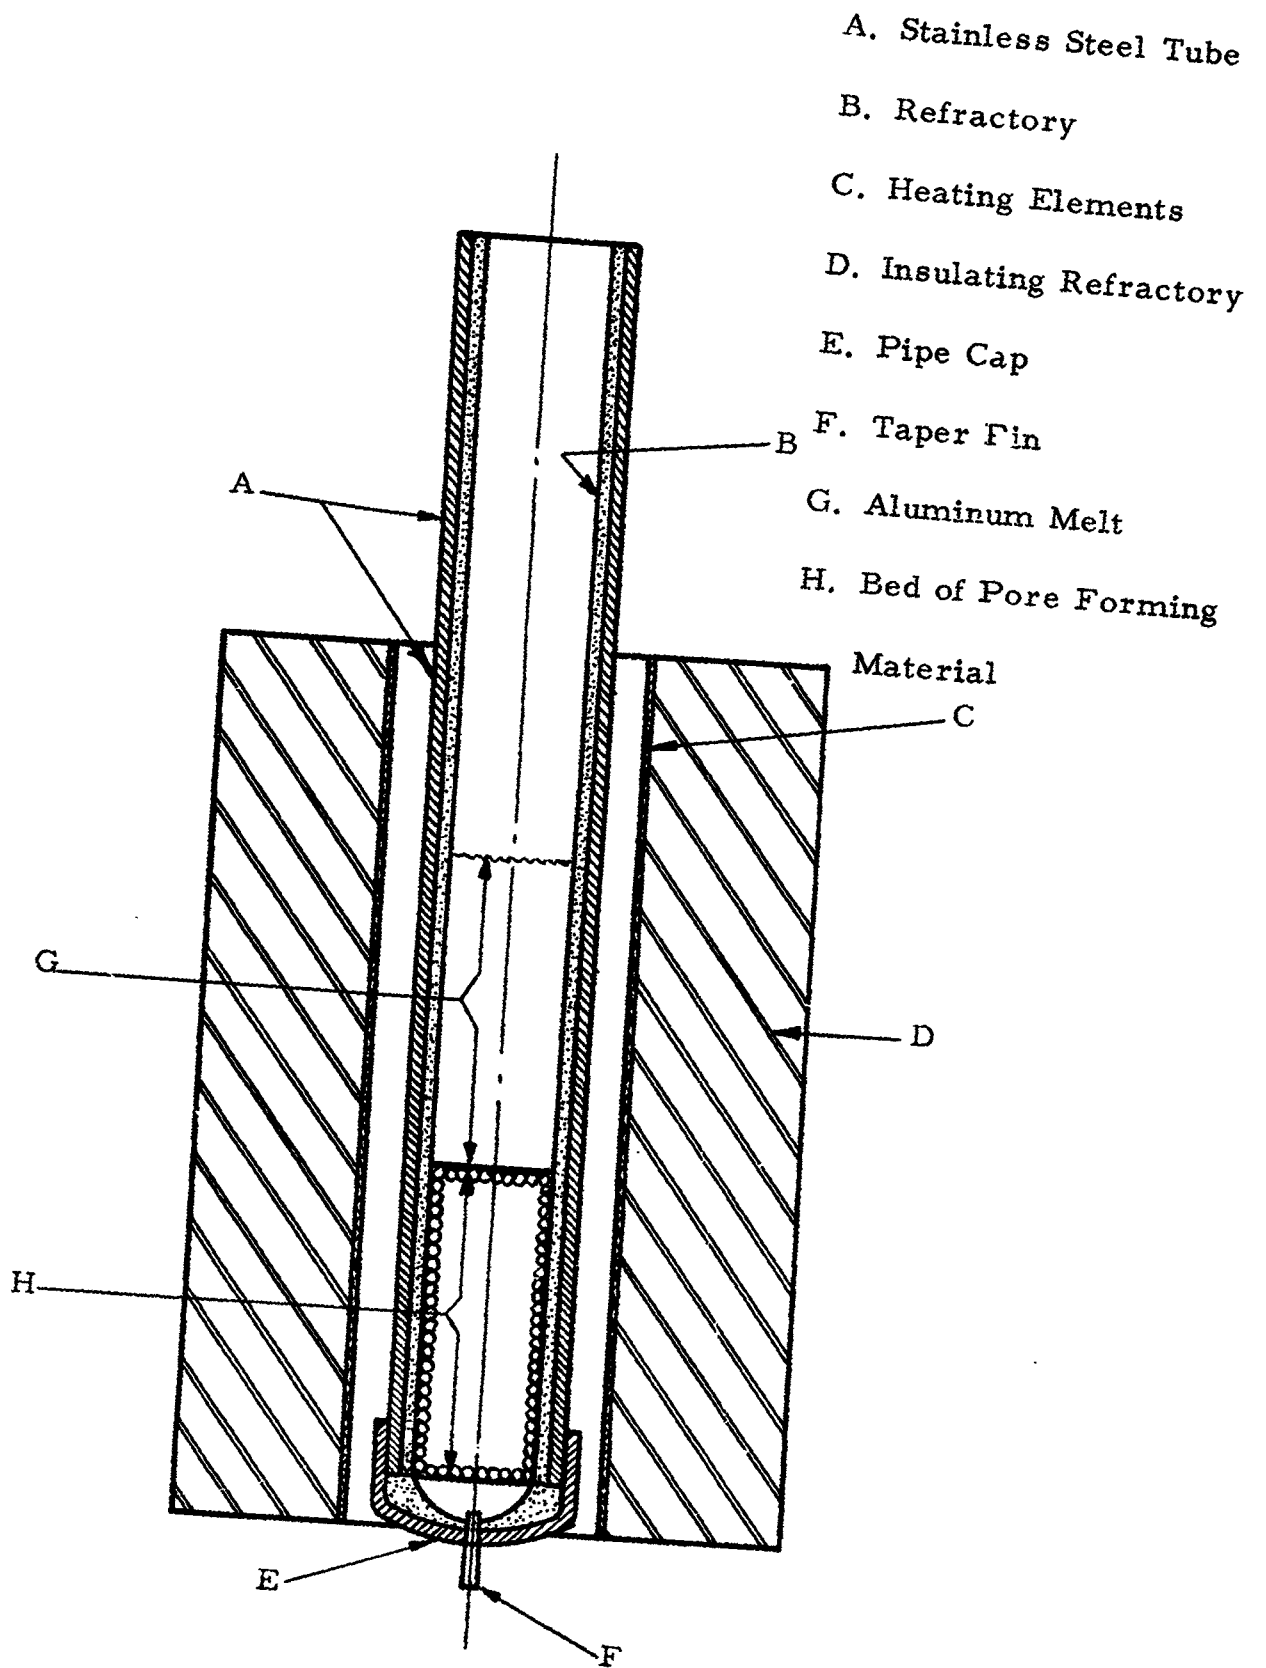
Mold Design and Furnace Setup for Pouring Molten Aluminum
